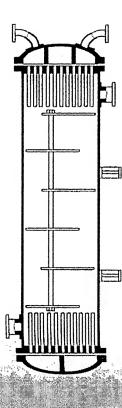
Heat exchanger with fixed tube plates (four tube, one shell-pass)
